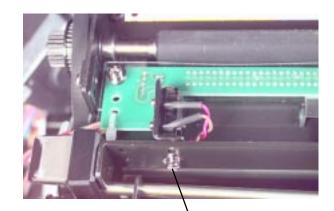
REMOVE (2) SCREWS TO DETACH COVER PLATE
